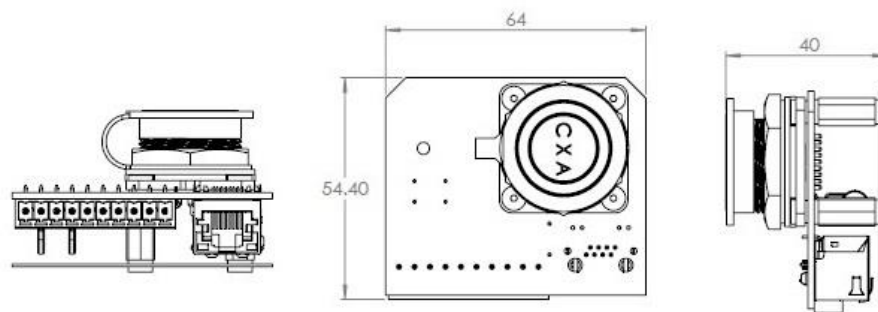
Patch Board Mk2 Dimensions (mm)
